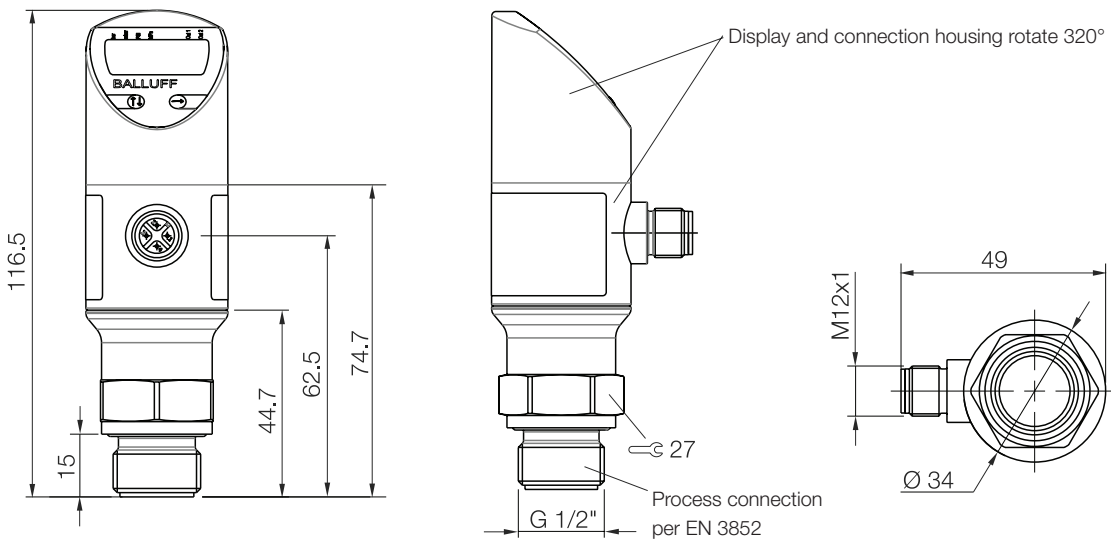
Dimensional drawing of flush-mounted pressure sensors, up to 50 bar
